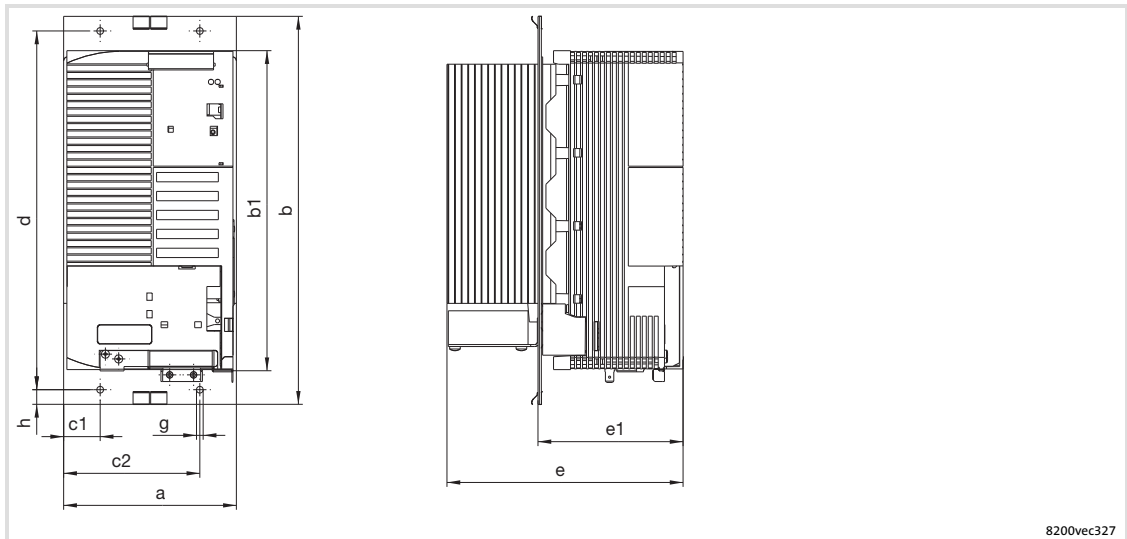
Dimensions for thermally separated mounting 3 ... 11 kW
